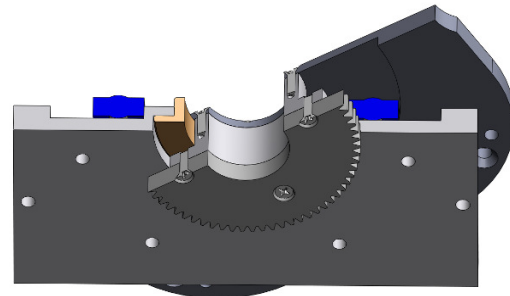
A cutaway view of bearings with faceplate rotated 45°
